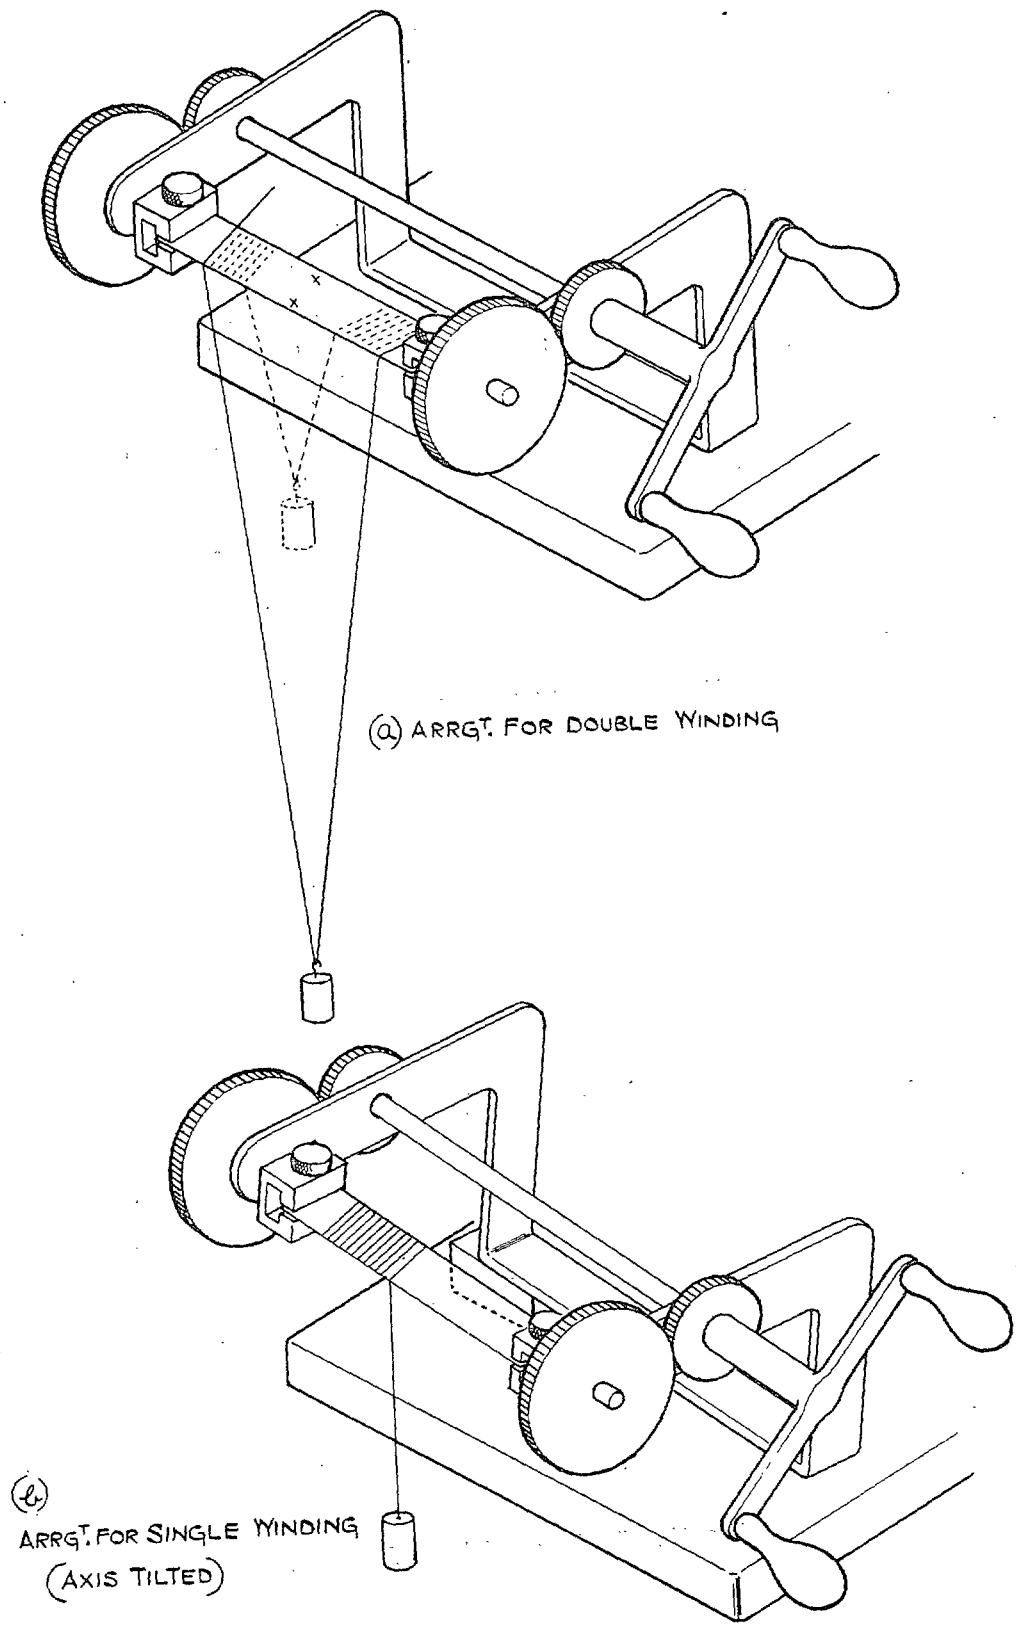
Schematic arrangement of R.A.E.-type gauge winding machine.
